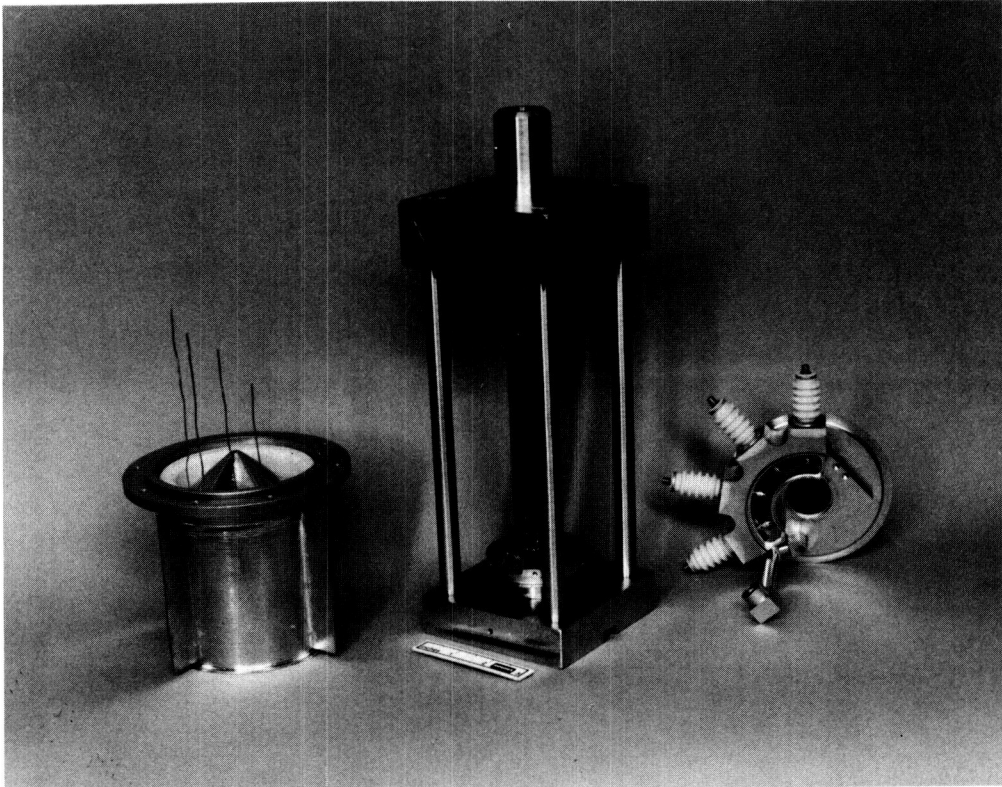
Photograph of 961H circuit assembly in the brazing fixture with the collector and collector faceplate assemblies.
